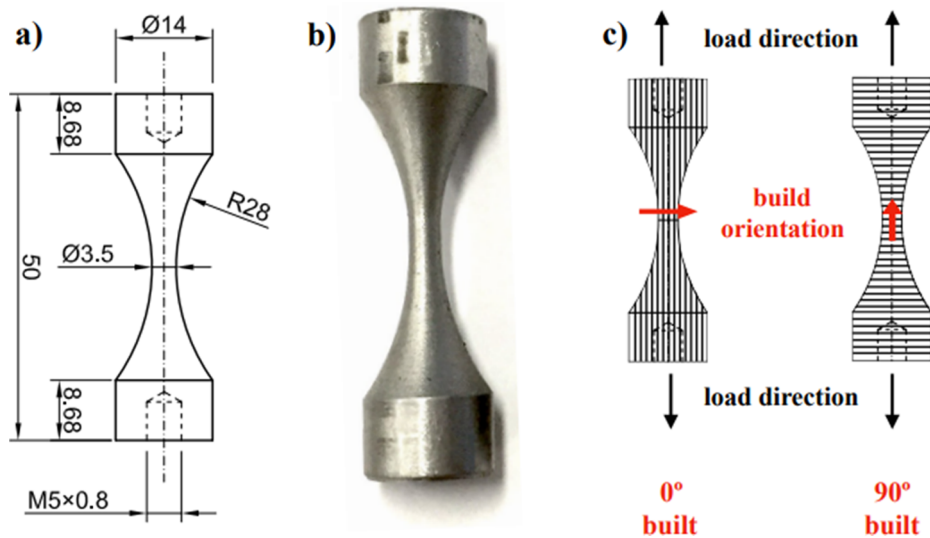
Hourglass specimen used in fatigue tests: a) specimen geometry (dimensions in mm), b) specimen photo and c) schematic of build orientation.
